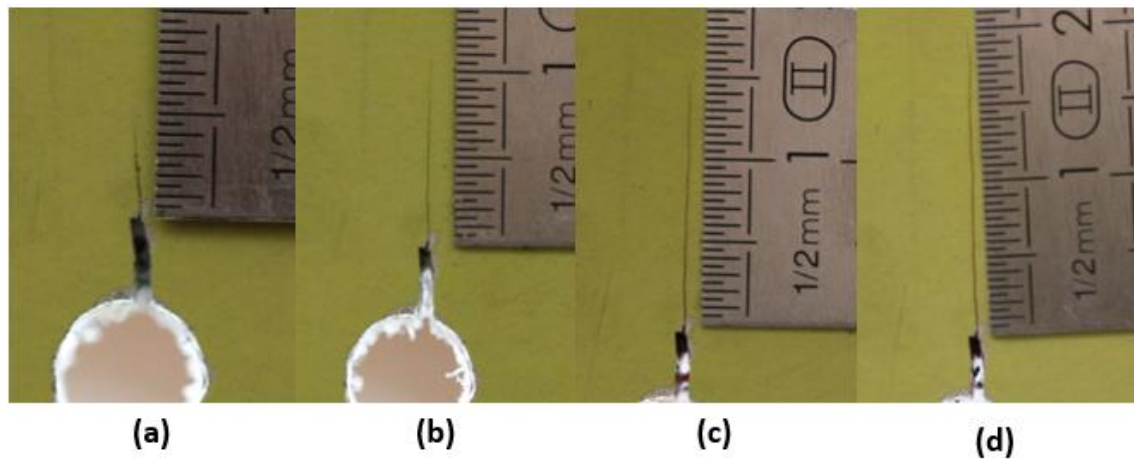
Imaged of the crack in the notch before test 1 (a), test 15 (b), test 17, (c) and after test 20 (d)
